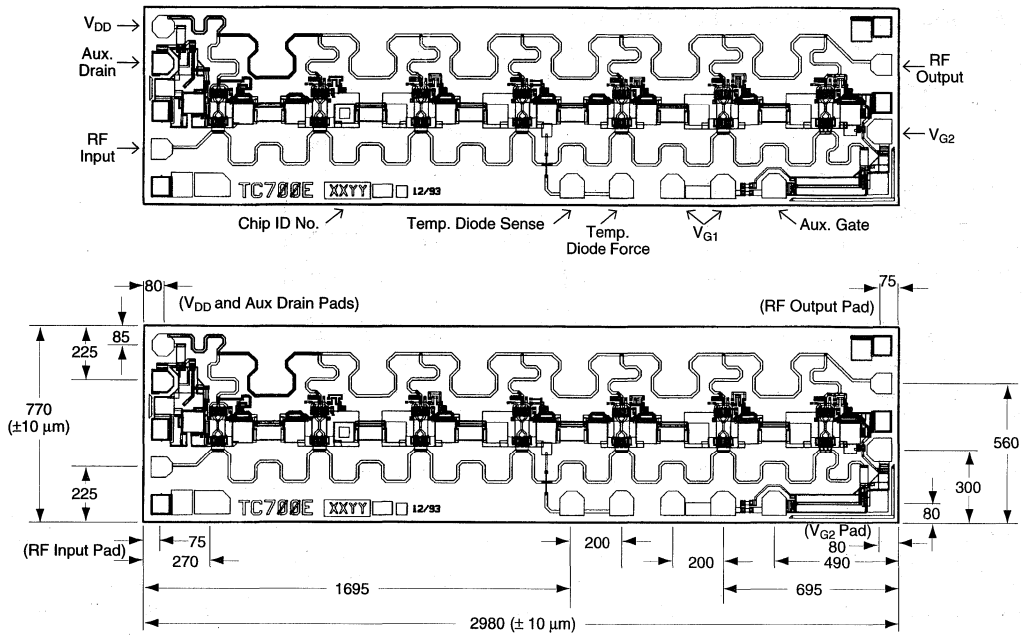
HMMC-5021/22/26 Bonding Pad Locations.
